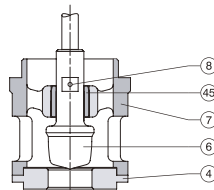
Bores - Types : 85-02, 85-08, 85-12, 85-62
